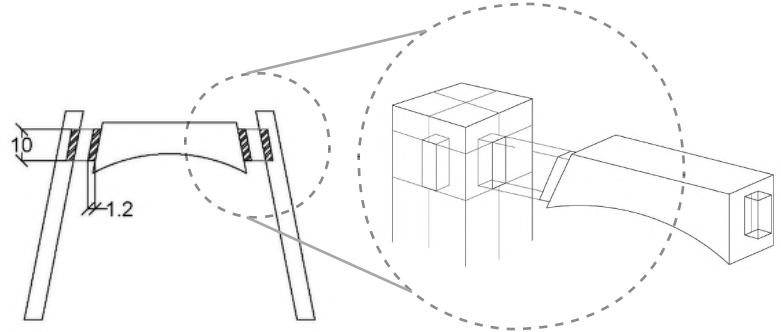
Mortise and Tenon Joinery detail, (2024)
